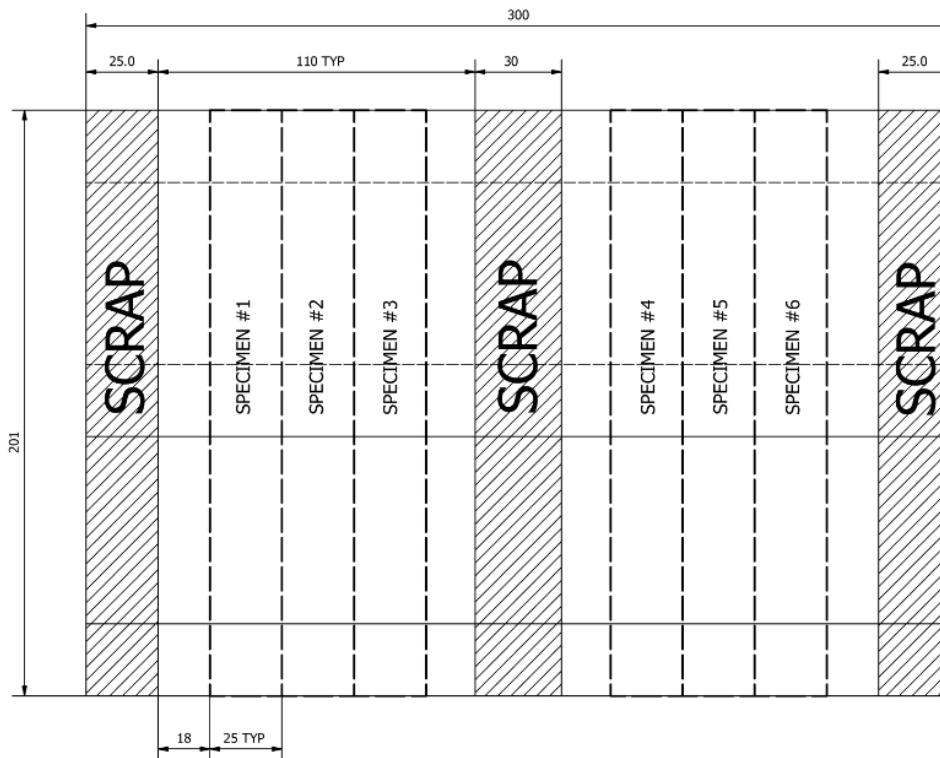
Typical panel cutting plan showing overall panel dimensions and cutting regions
